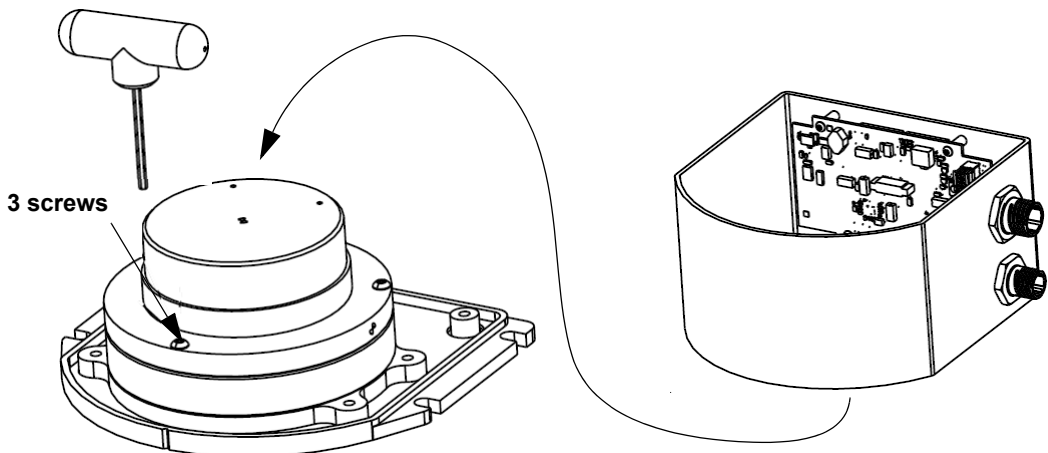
Lift Top Cover, Tube Body and 3 Ring Spacer Screws
